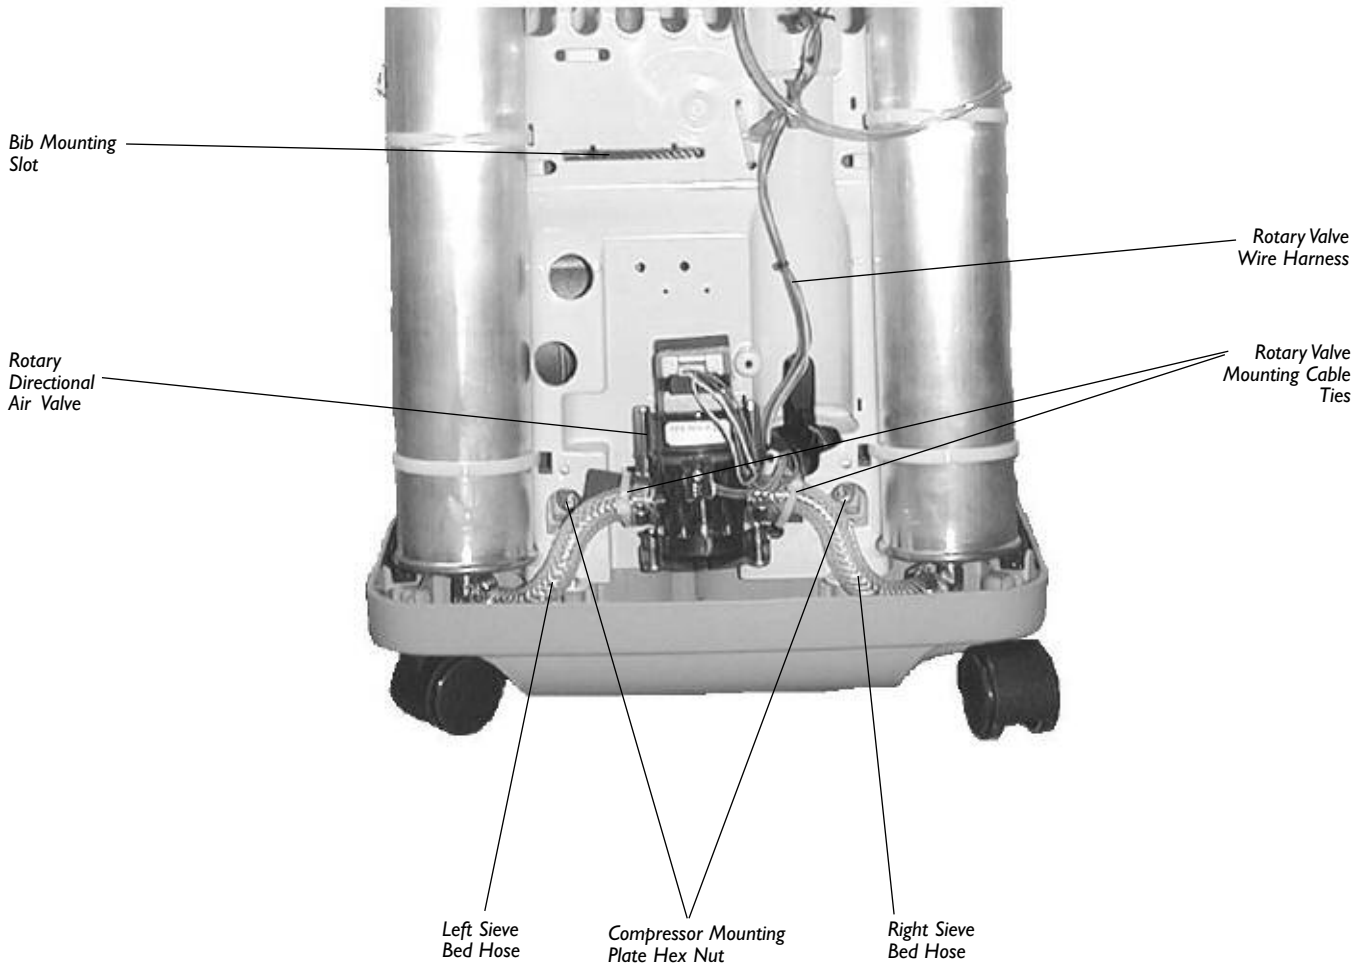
A - Interior, Front Lower View (515AKS and 515AKZ)
